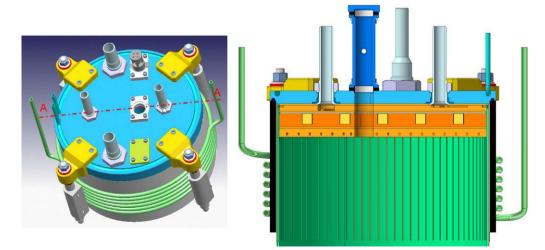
A single RF driver (on the left) and its section showing the faraday shield, back plate heat removal system and the magnets housing.
